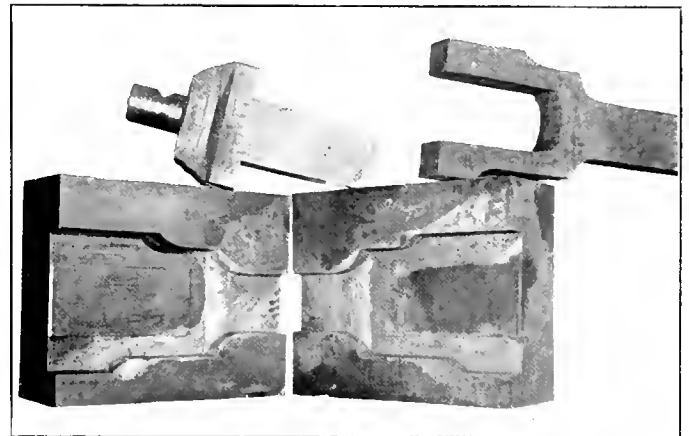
Dies for Forming Forked End of Main Rod; Chicago & North Western.
